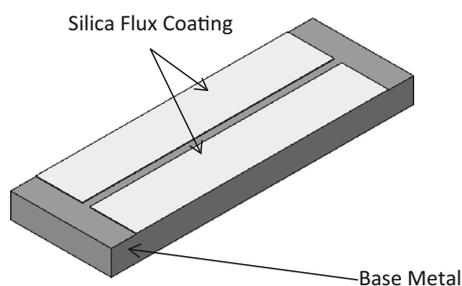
A schematic diagram showing the configuration of the weld plates with the flux coat
